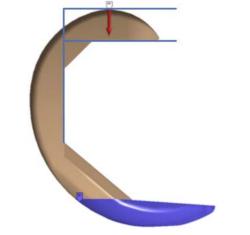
Apex Location and Anterior Flange Constraint (lateral view)
